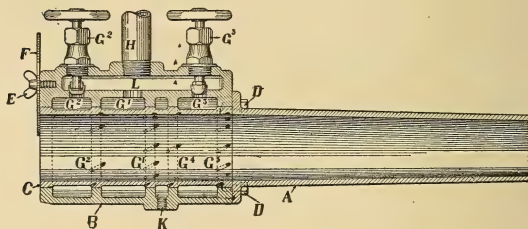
SECTIONAL VIEW OF GWYNN GAS BURNER
